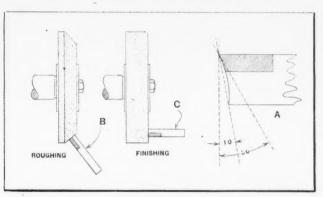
Methods of Grinding Roughing and Finishing Tools
